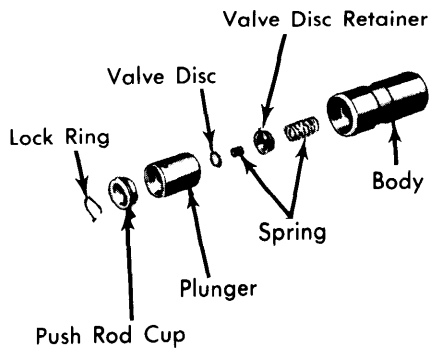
Disassembled View of Hydraulic Valve Lifter
